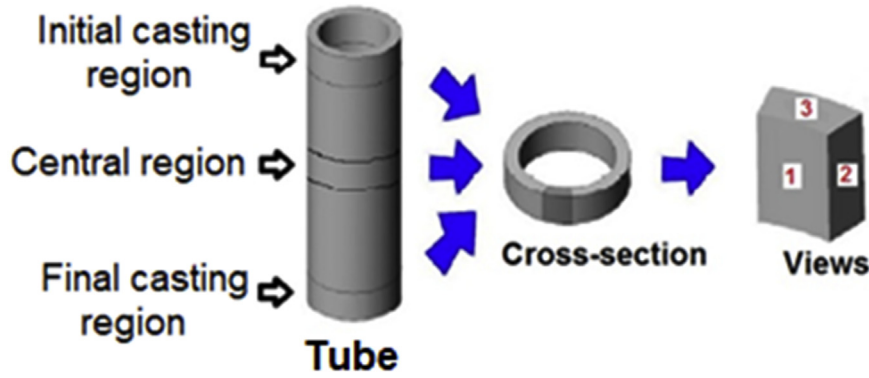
Cutting scheme of tubes produced by centrifugal casting.
